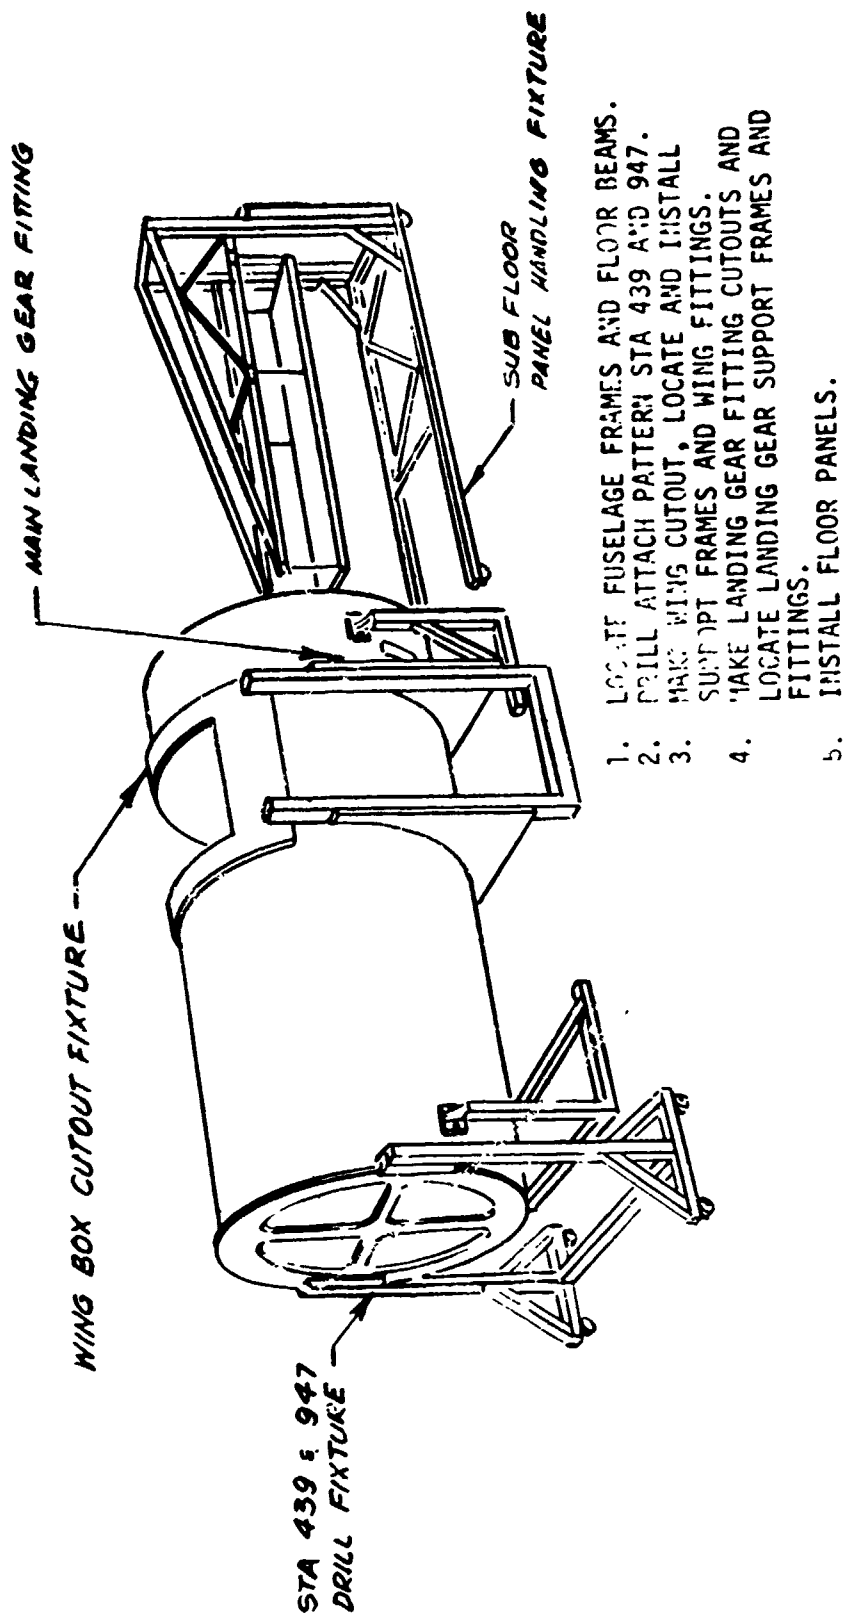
FUSELAGE CONSTANT SECTION ASSEMBLY
